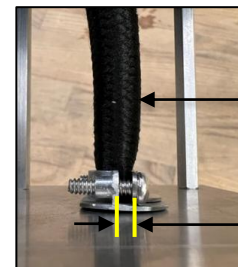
STRAIN RELIEF WITH CORD INSERTED
